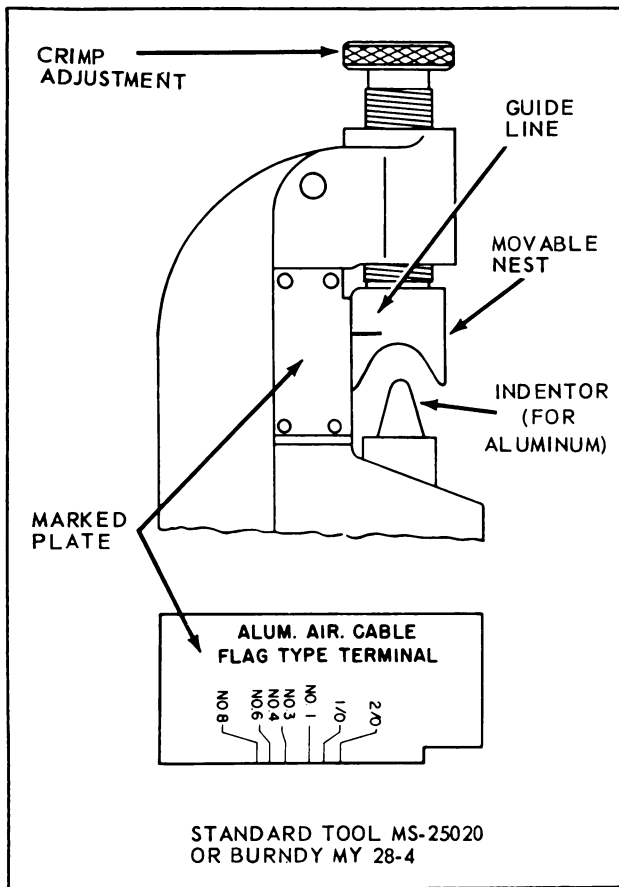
Tool - Hand Crimping - Aluminum Terminals
